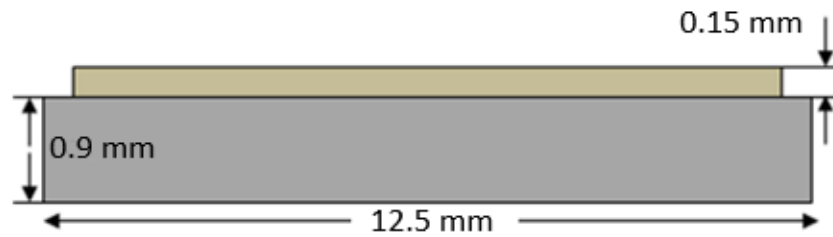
drawing of TBC coupons manufactured for preliminary experiment
